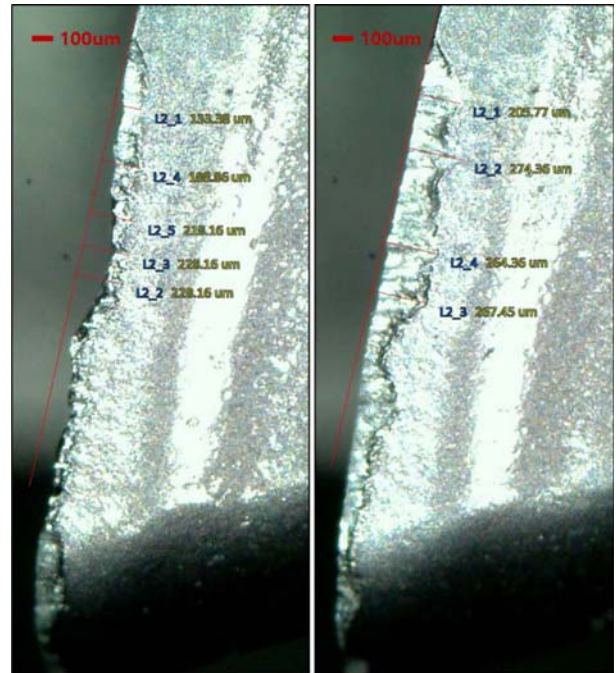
Pictures of measured tool wear (Workpiece: SM45C)
